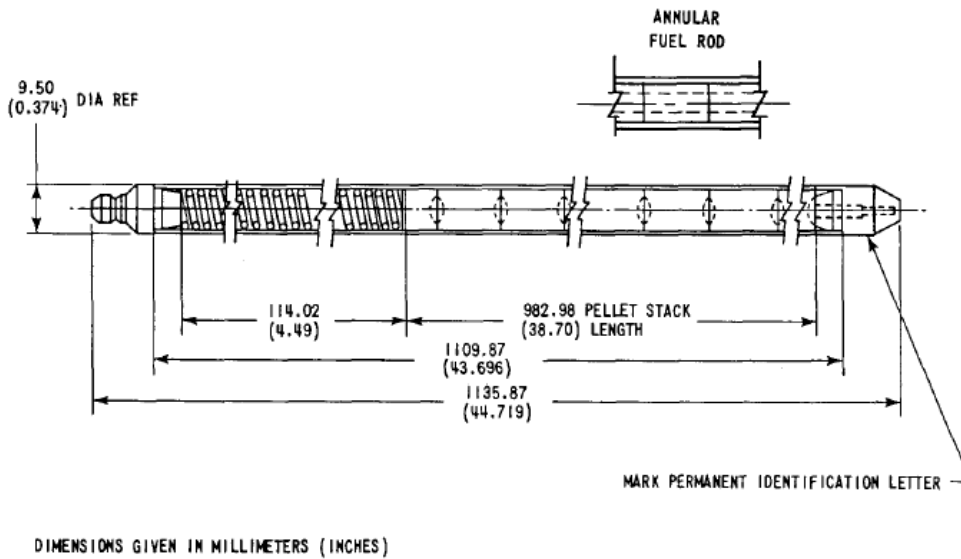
PWR Super-Ramp project: W test fuel rod: overall design.
